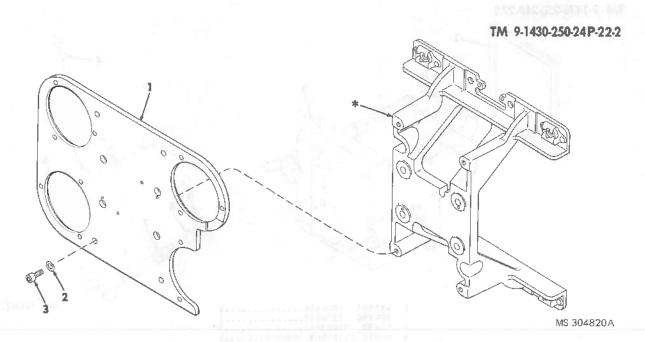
HOLDER, SEMICONDUCTOR DEVICE /9991631/-EXPLODED VIEW /SEE FIGURE 140 FOR NEXT HIGHER ASSEMBLY/
